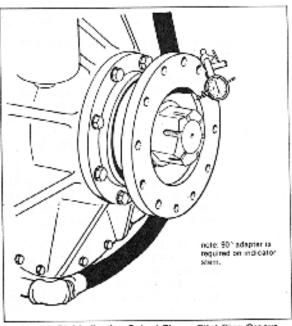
Dial Indicating Output Flange Pilot Ring Groove
